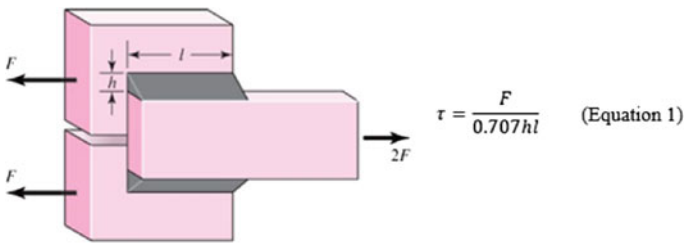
Welding stress calculation. Source Mechanical Engineering Design, Shigley
